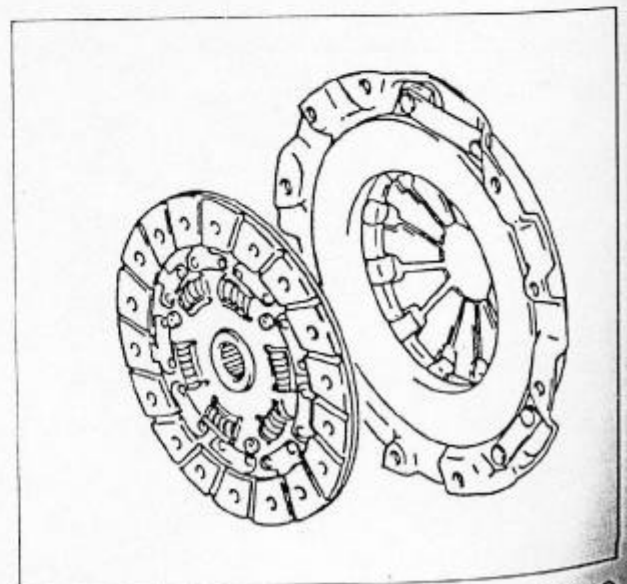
B — 2 CLUTCH PRESSURE PLATE AND DISC
